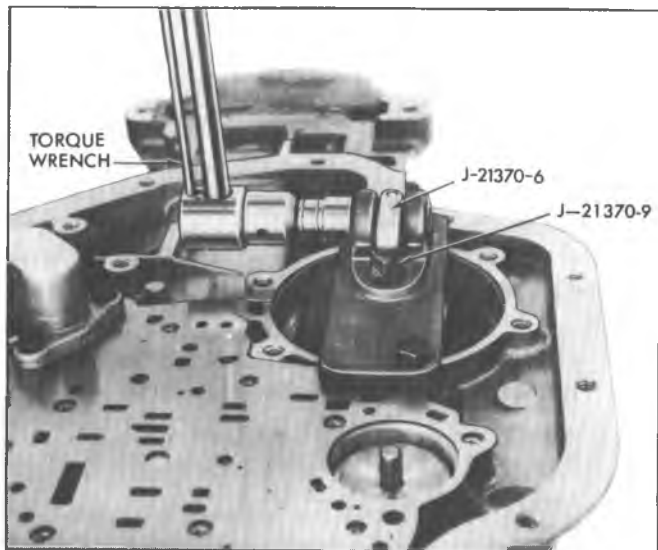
B-Checking Rear Band Apply Pin - Model "CL"
